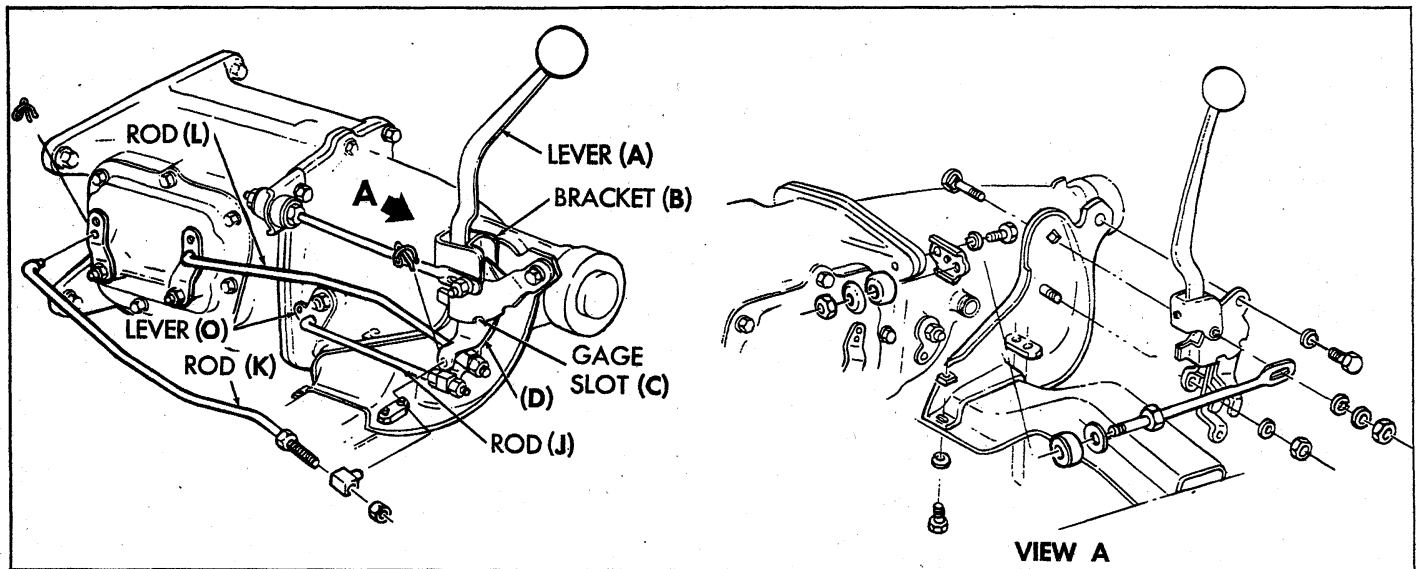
M - Four-Speed (Muncie) Transmission Gearshift Linkage Camaro & Corvette (Typical)
